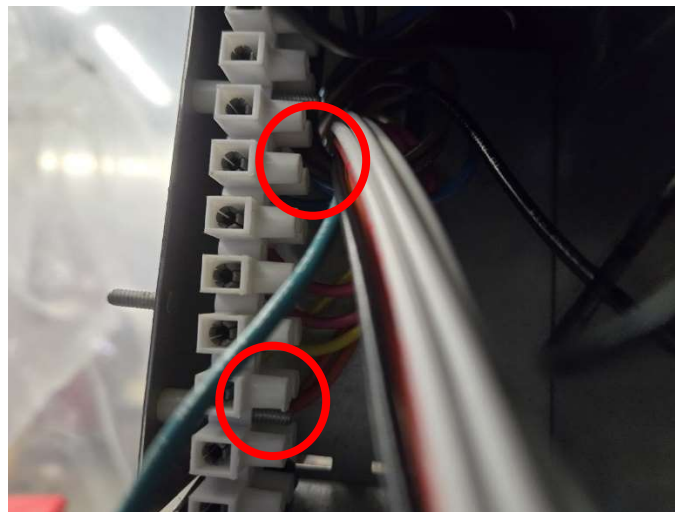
Wing Nut Locations Holding the Terminal Block in Place
